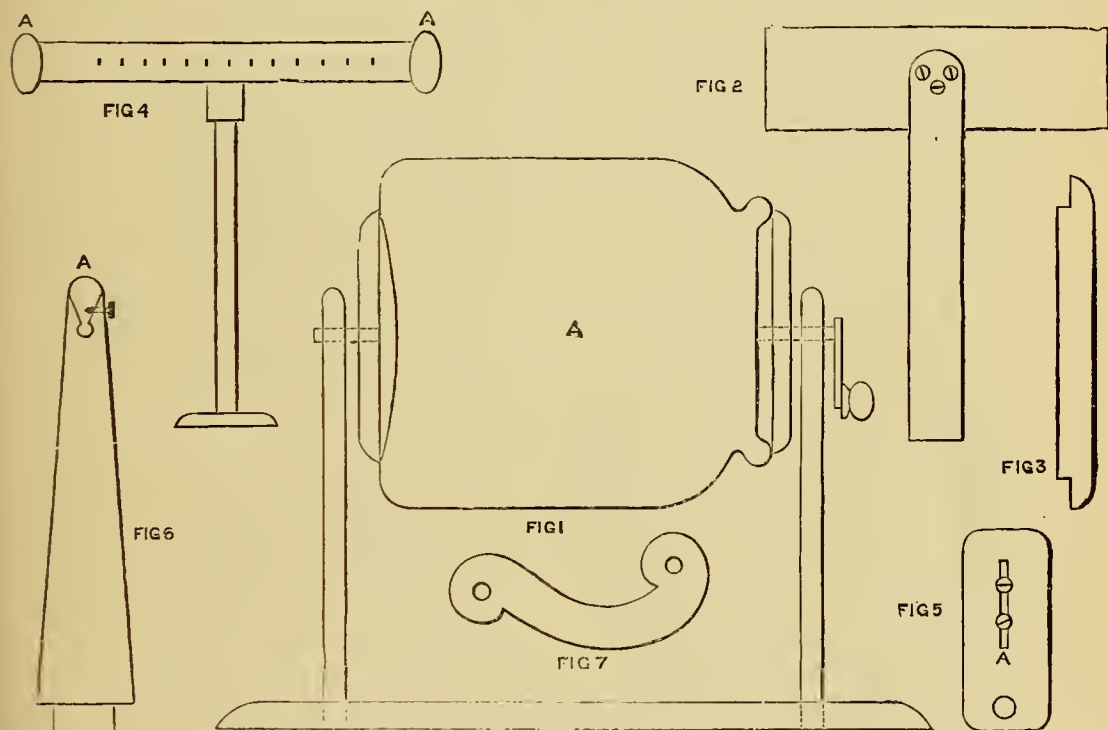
SECTION OF MACHINE—A, Sweet Jar for Cylinder. FIG. 2.—RUBBER. FIG. 3.—BUNG FOR OPEN END OF CYLINDER. FIG. 4.—PRIME CONDUCTOR—A, A, Brass Knobs. FIG. 5.—FOOT OF PRIME CONDUCTOR—A, Slot for Adjusting Conductor to Cylinder. FIG. 6.—STANDARD—Two required: A, Wedge fastened with small screw. FIG. 7.—CRANK HANDLE.
